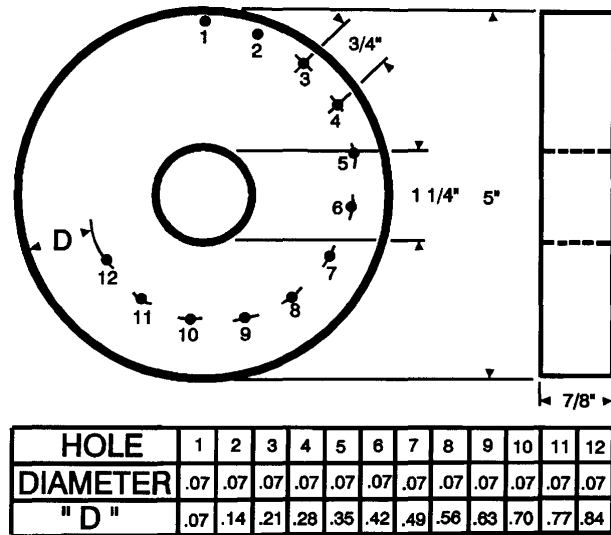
Drawing of a Tool Steel Ring Specimen (Ketos Ring) with Artificial Sub-Surface Defects
